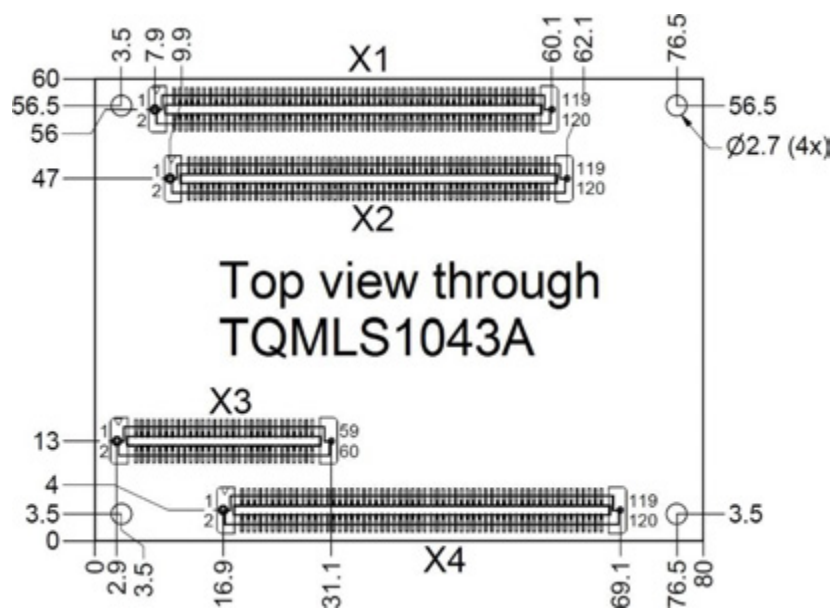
TQMLS1043A dimensions, top view through TQMLS1043A
